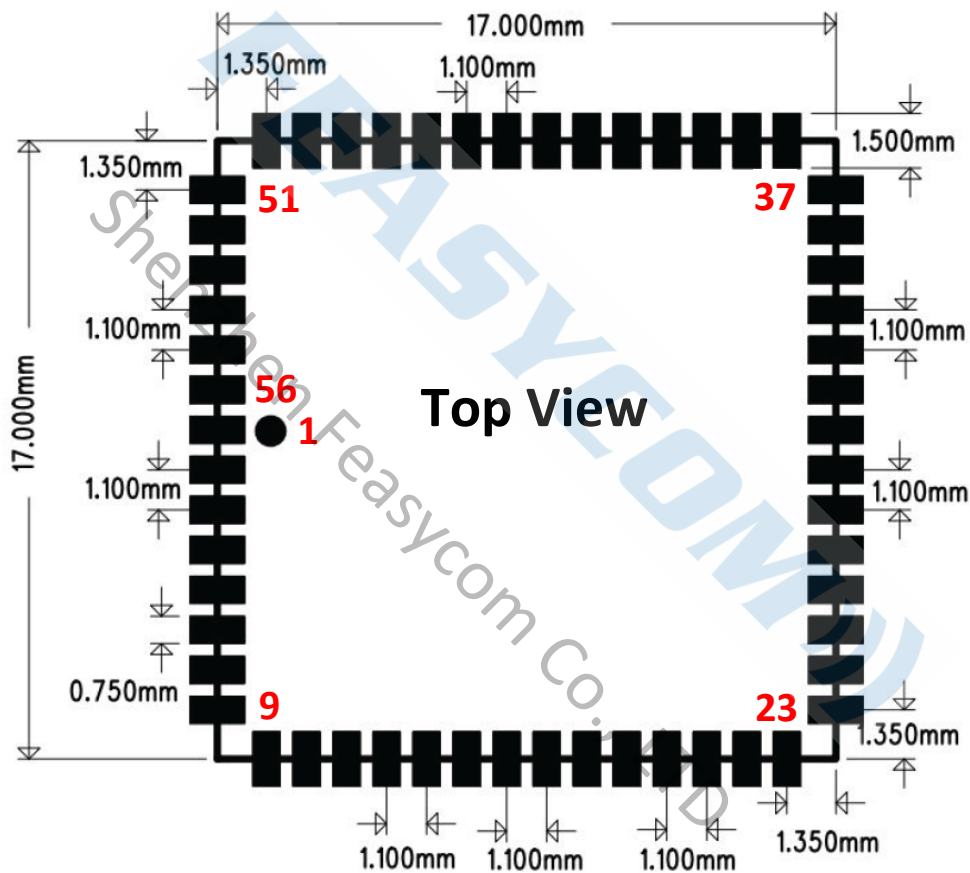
FSC-BW3583V footprint Layout Guide (Top View)
